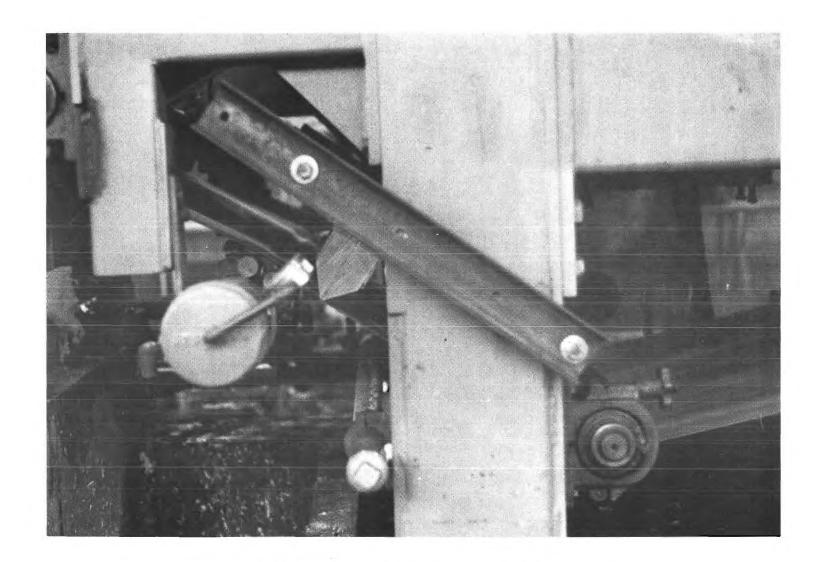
MACHNOZZLE ON THE PILOT PAPER MACHINE.
